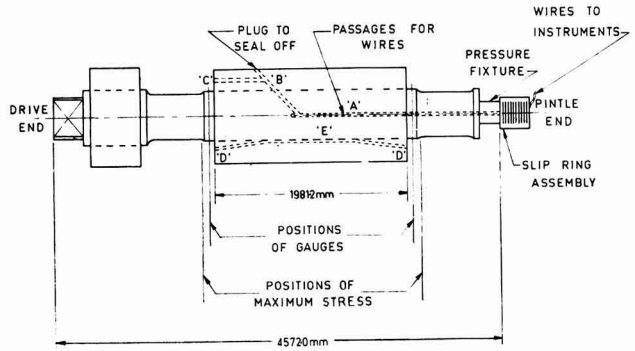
Diagram of mill roller shaft showing positions of strain gauges and passages for connecting wires
